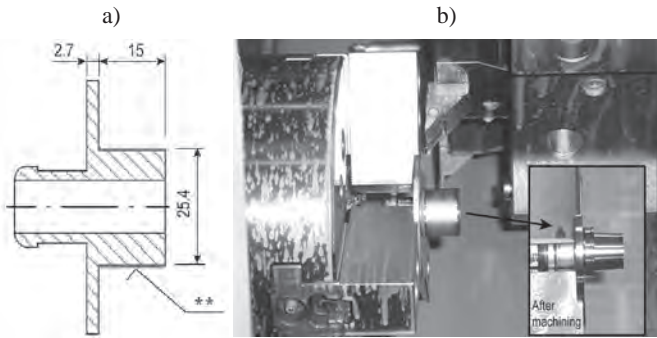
Shape of semi-finished product (a) and photo of its machining (b)
